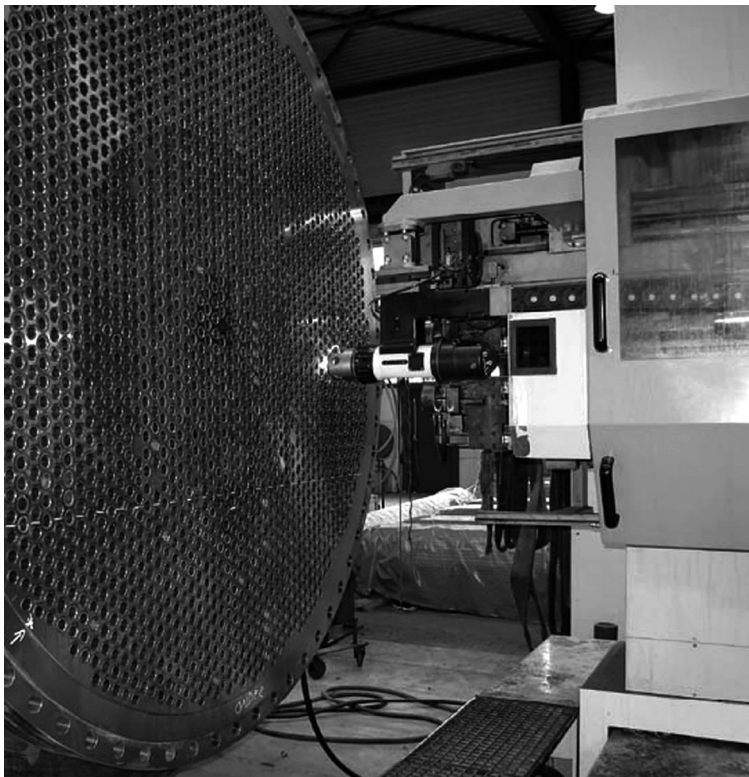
CNC controlled automatic tube-to-tubesheet welding. (Courtesy of Vermeer Eemhaven B.V. Bunschotenweg, Rotterdam, the Netherlands.)
